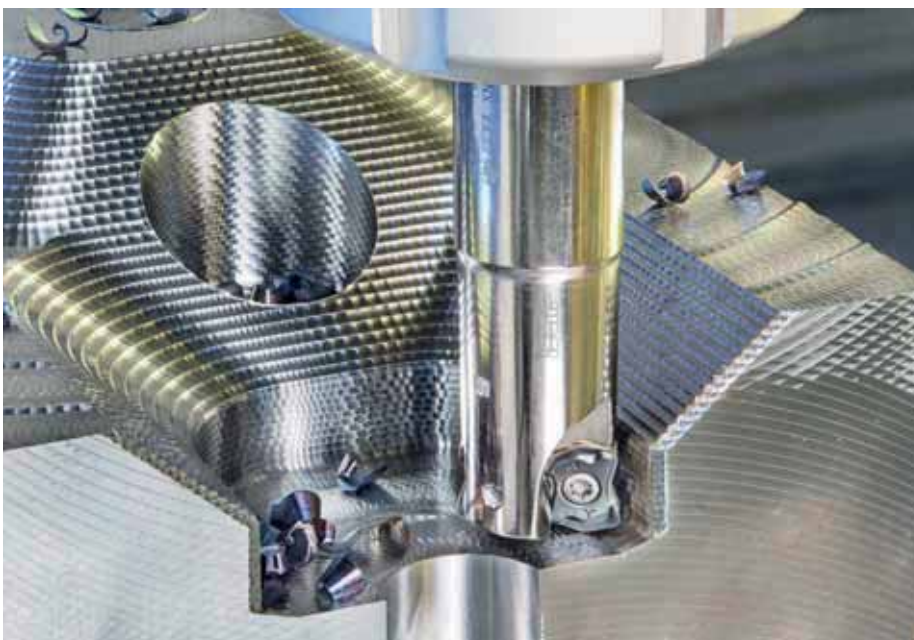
Indexable milling cutters for machining aluminum at extremely high cutting speeds are specifically engineered to eliminate insert radial displacement, which may occur due to the high centrifugal forces.
